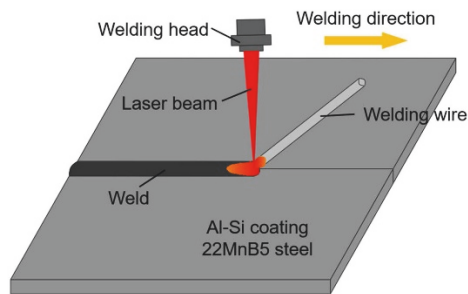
Schematic diagram of laser welding with filler wire[6].
